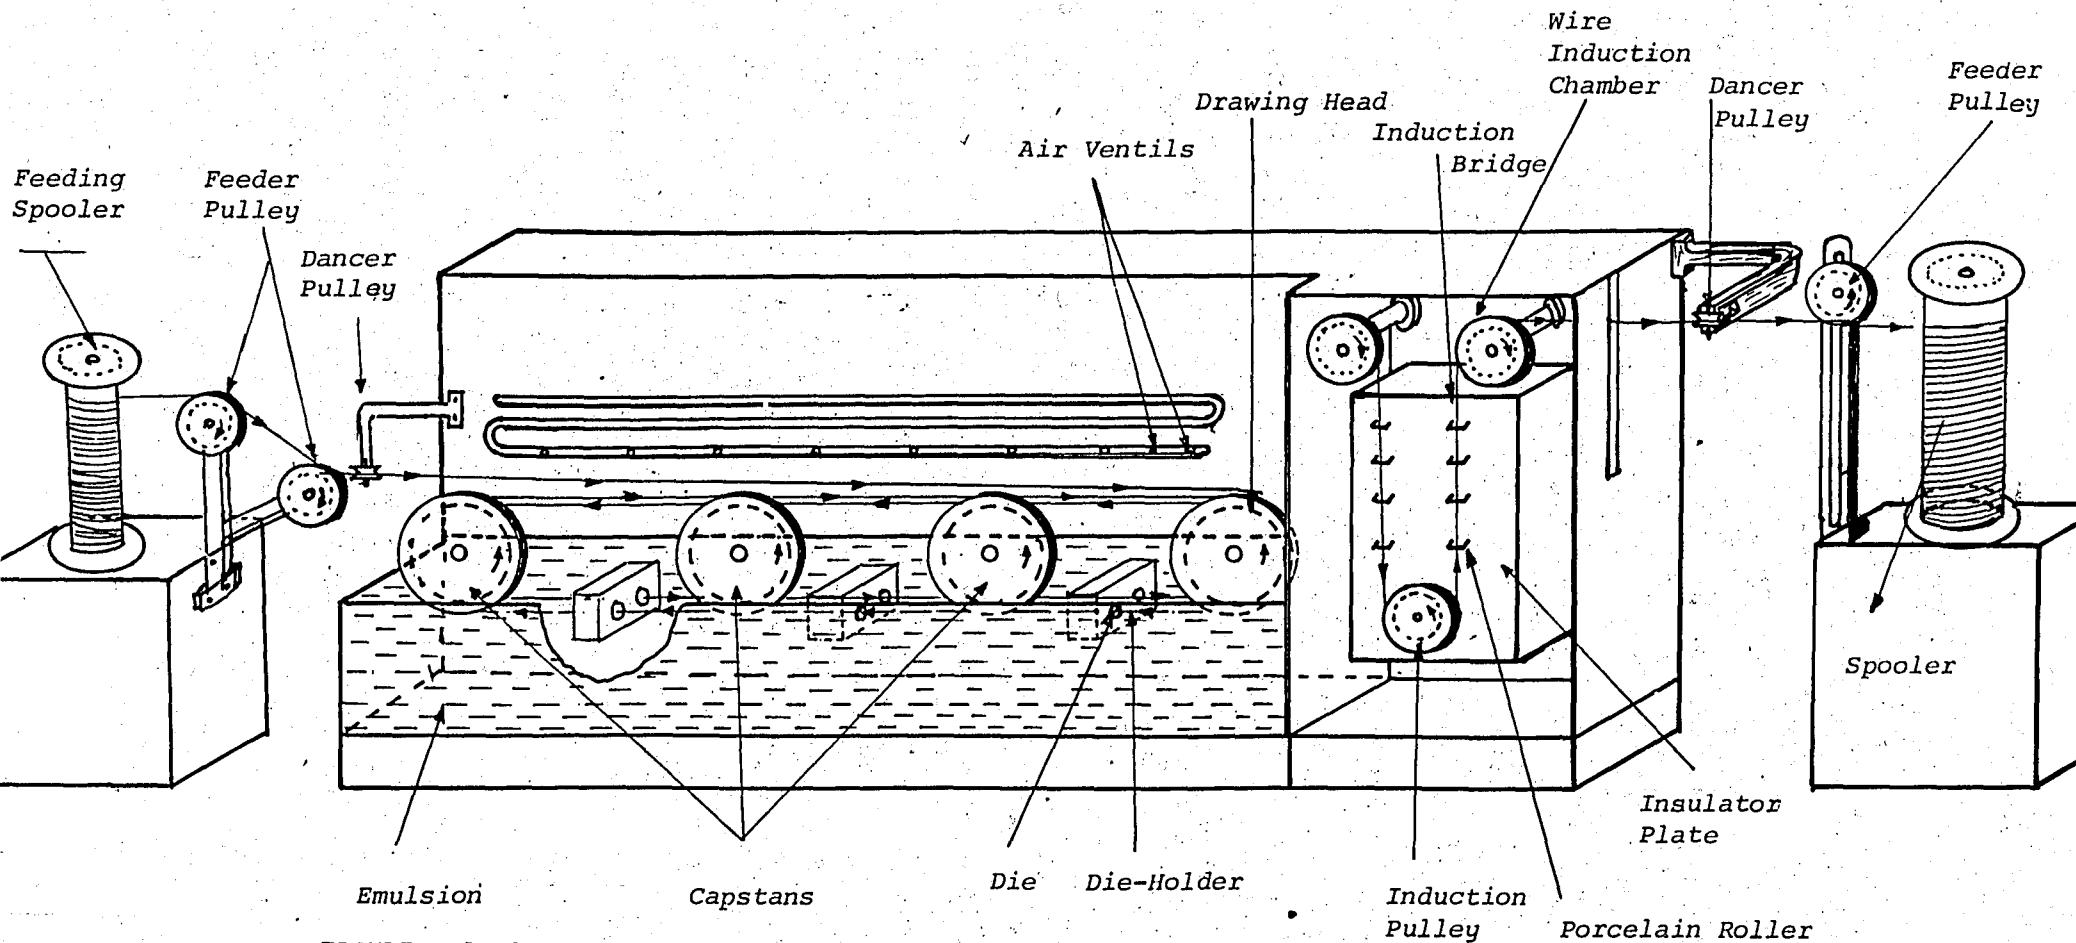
A CROSS-SECTIONAL VIEW OF A WIRE-DRAWING MACHINE
